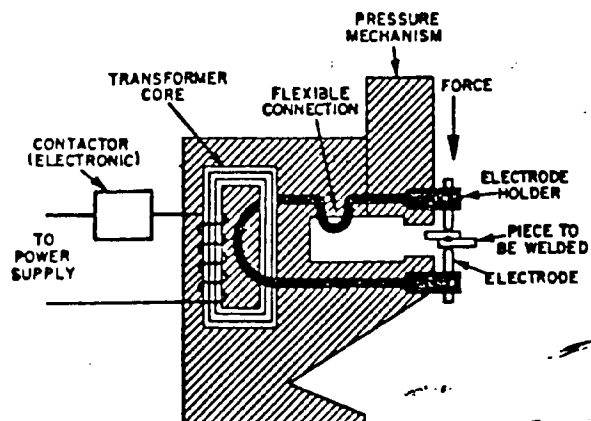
Schematic diagram for resistance welder (1093803)
